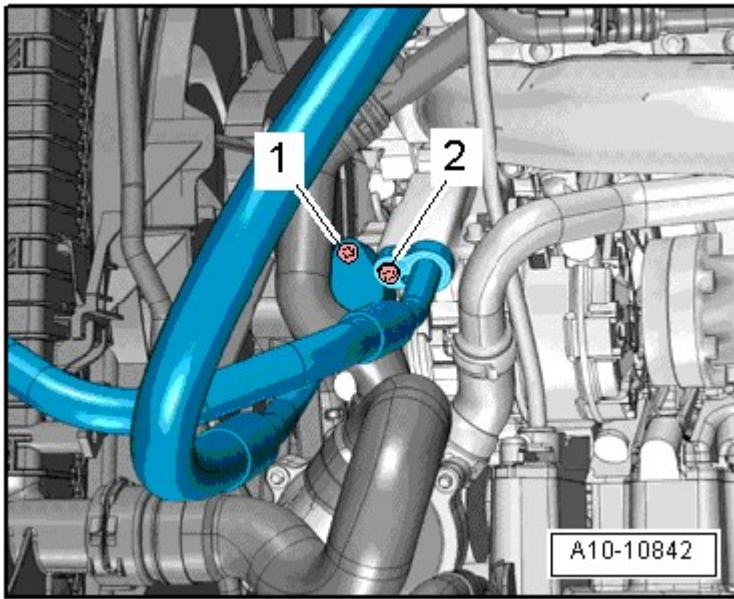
Identifying Bolts & Refrigerant Lines To A/C Compressor
